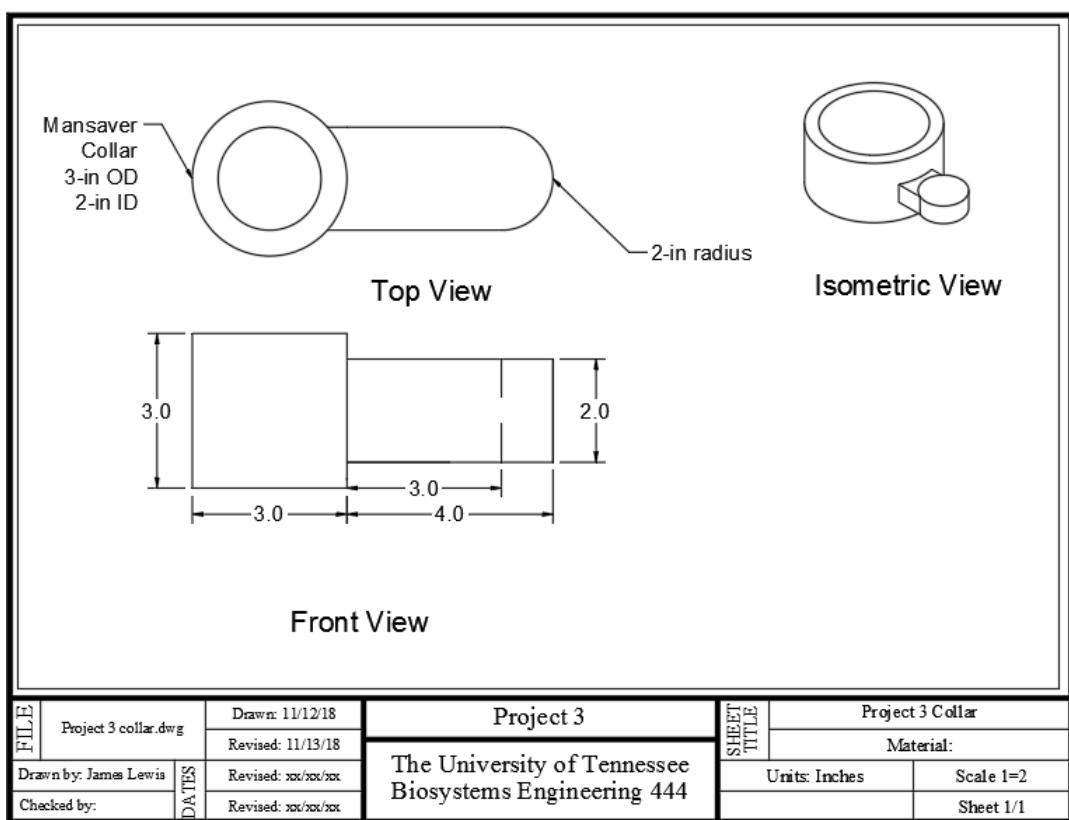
The above AutoCAD drawing lists the dimensions of the collar attachment. It will be machined from a 2x2x4 A36 steel bar.
